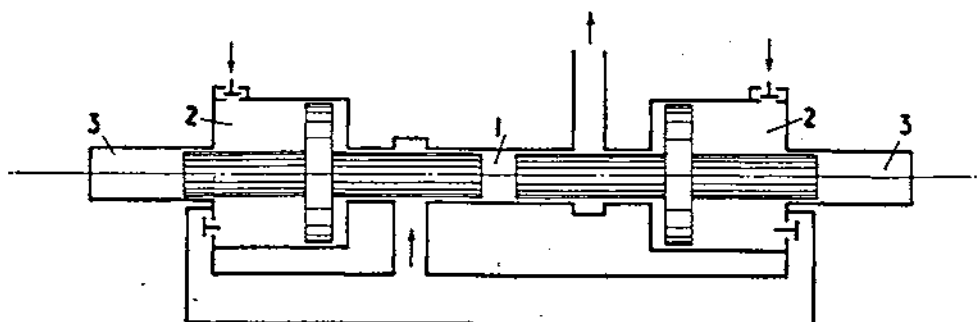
Diagram of outward-compressing type of free-piston gas generator.
